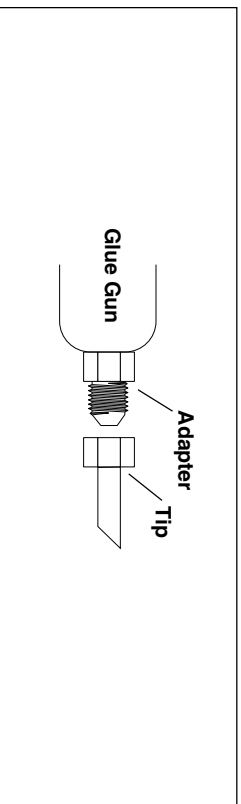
Glue gun ($\frac{3}{8}$ "-16 external threads) and tip ($\frac{3}{8}$ "-16 internal threads).
